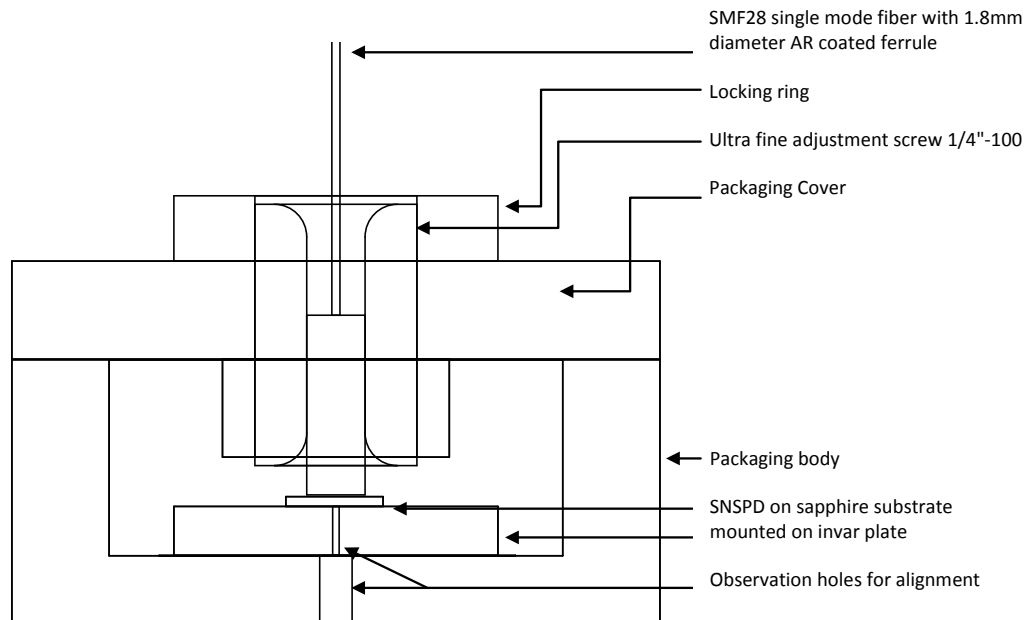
Front cutaway view of the CAD drawing of the package assembly.
